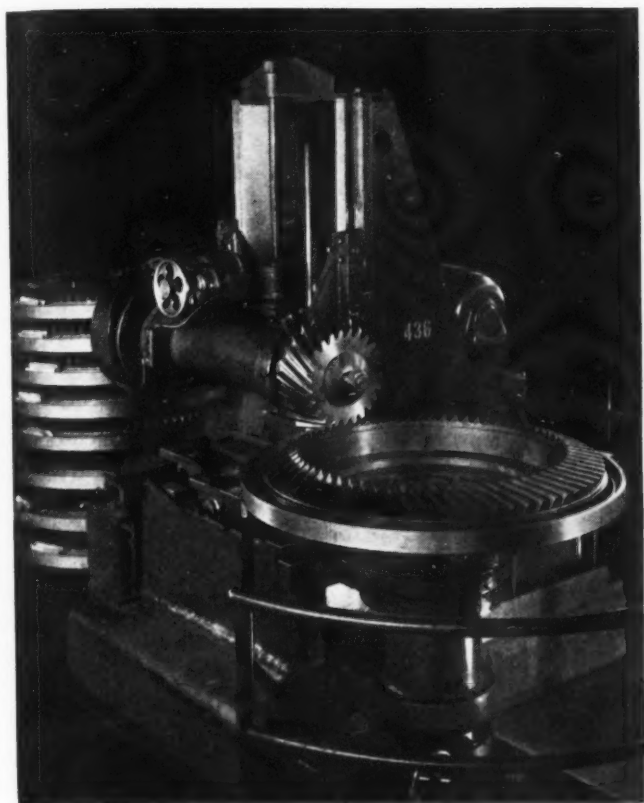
Spiral Bevel Gears and Pinions are Carefully Checked for Tooth Contact before and after Flame-hardening of the Teeth
